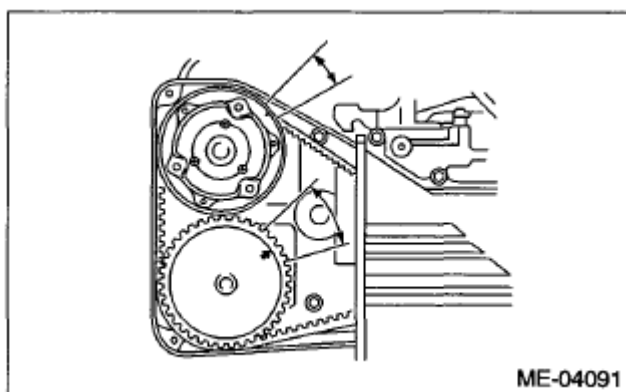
Measuring Clearance Of 1 Cylinder Intake Valve And 3 Cylinder Exhaust Valve
